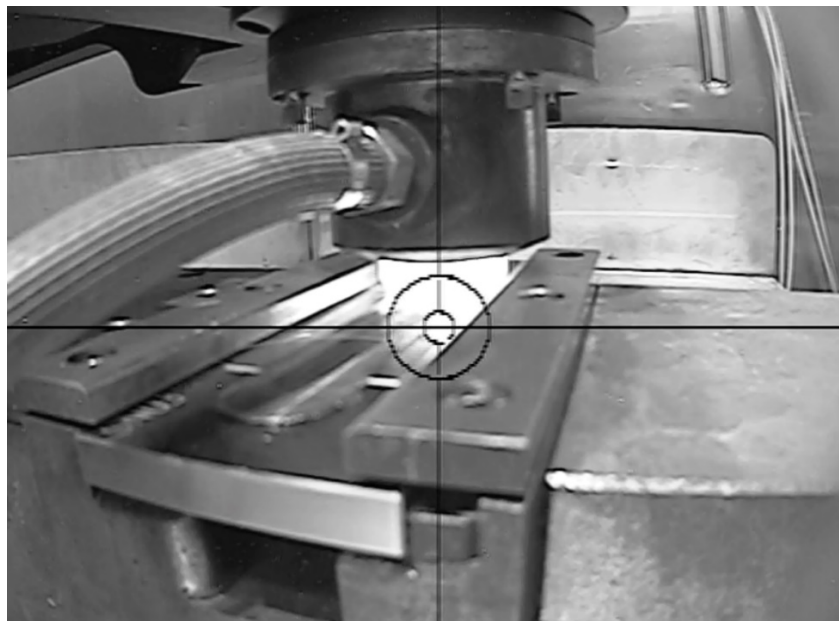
Friction Stir Welding of Irradiated Coupon 304B-1 in Progress
